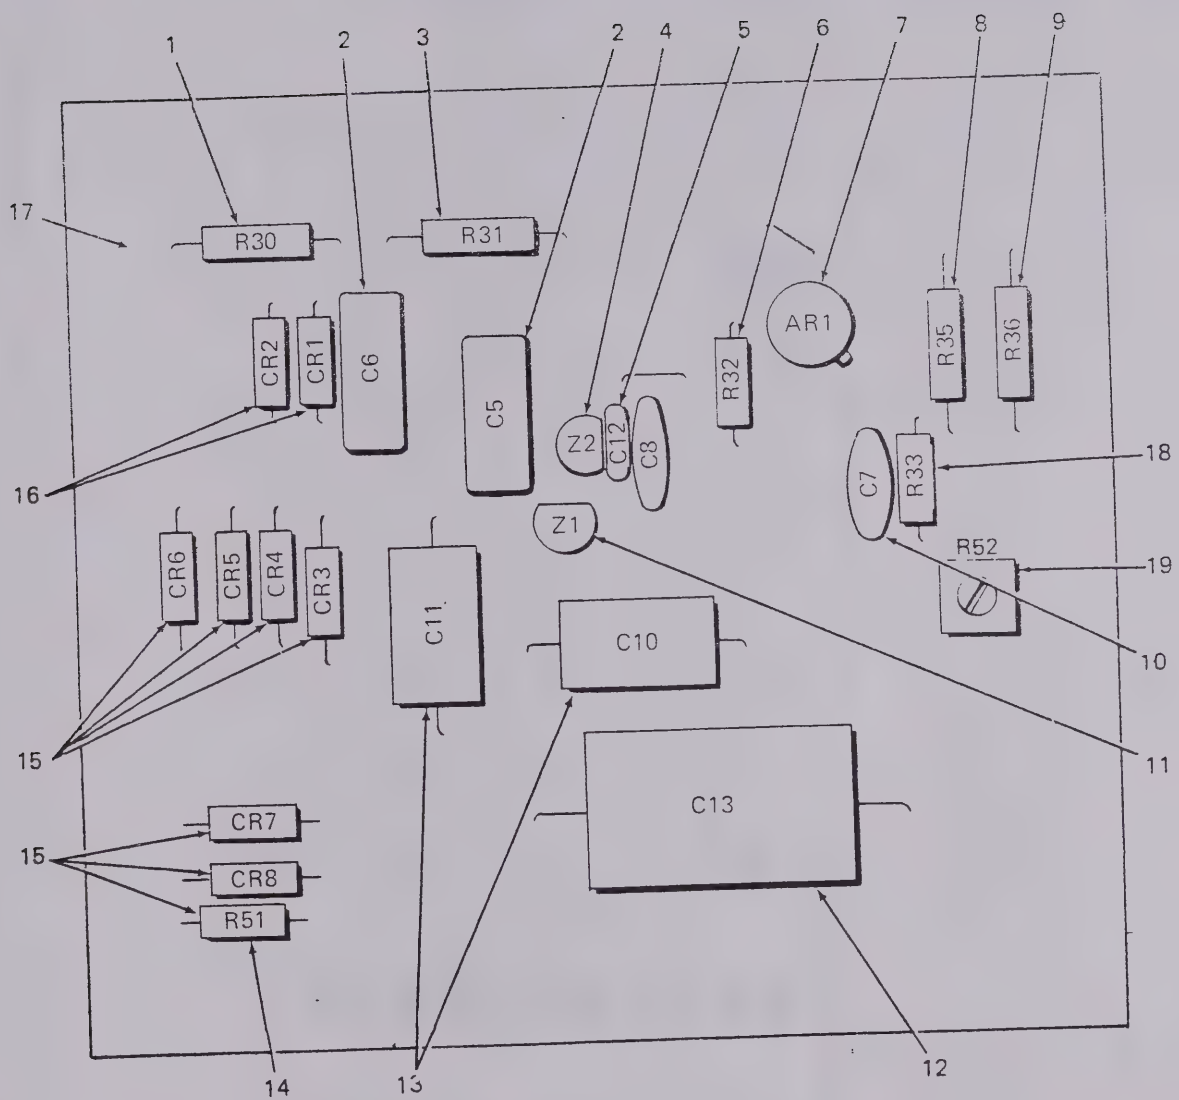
Amplifier Board Assembly, Part No. 2421-745
